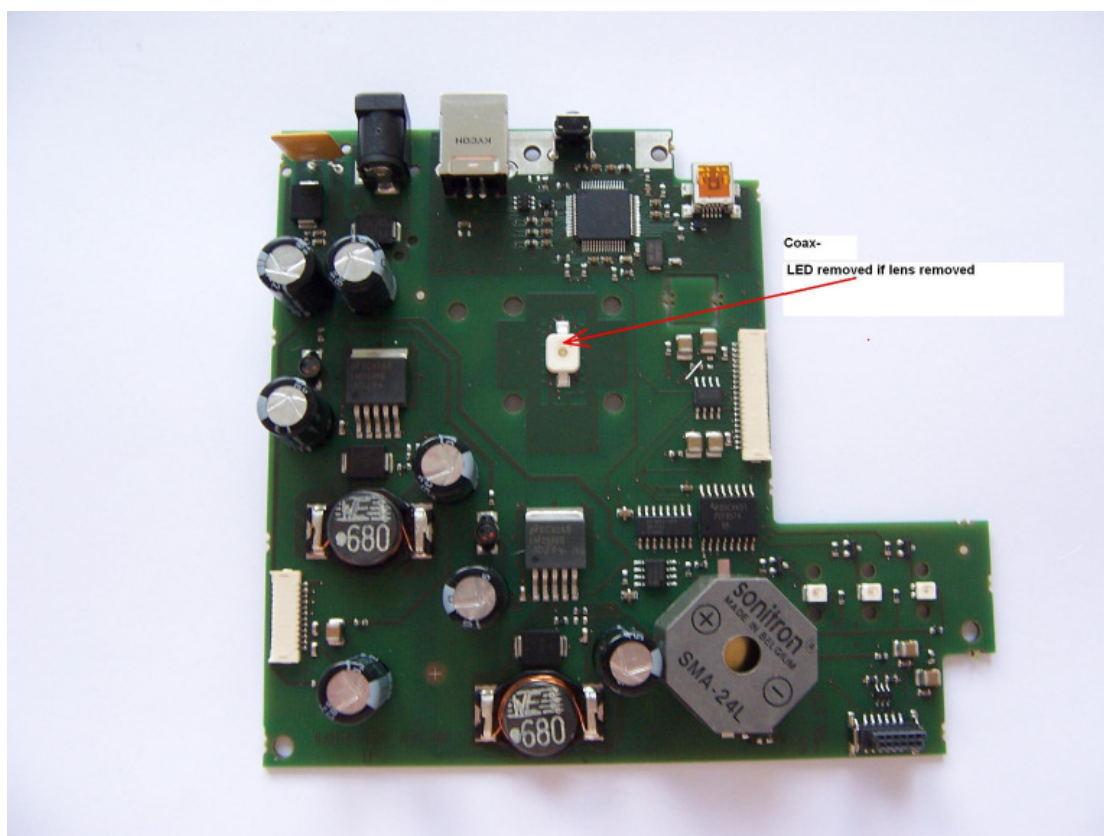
Power PCB with LED and lens, RJ0479:312.25 RevD,
